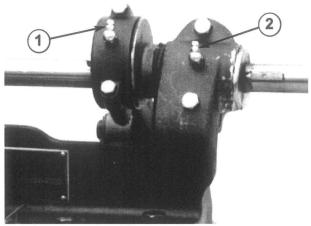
Lubrication Points. (1) Eccentric Arm Assembly, (2) Main Frame Casting
